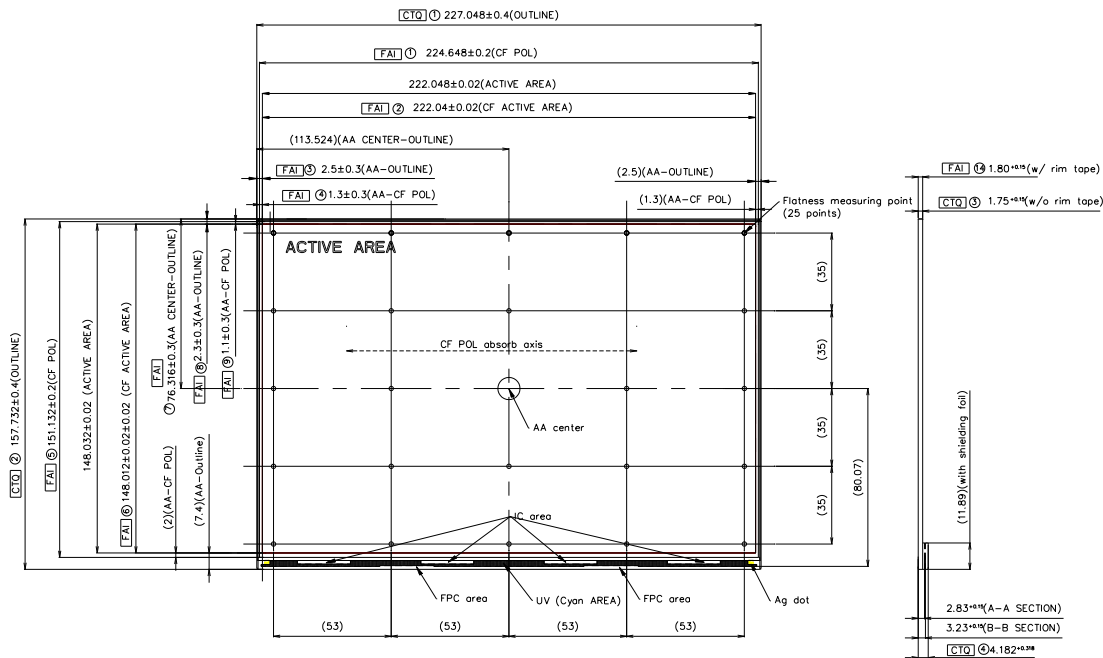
TFT-LCD Module Outline Dimension (Front View)
